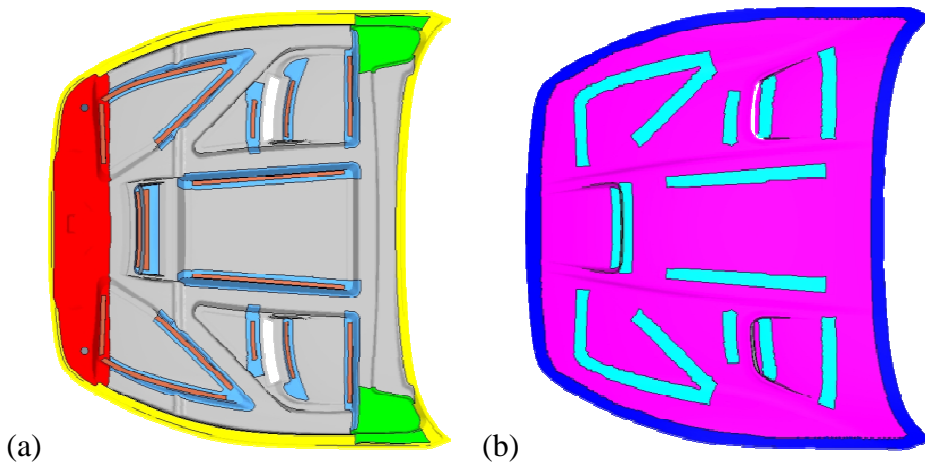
Prototype 1 layout - (a) inner panel; (b) outer panel.
